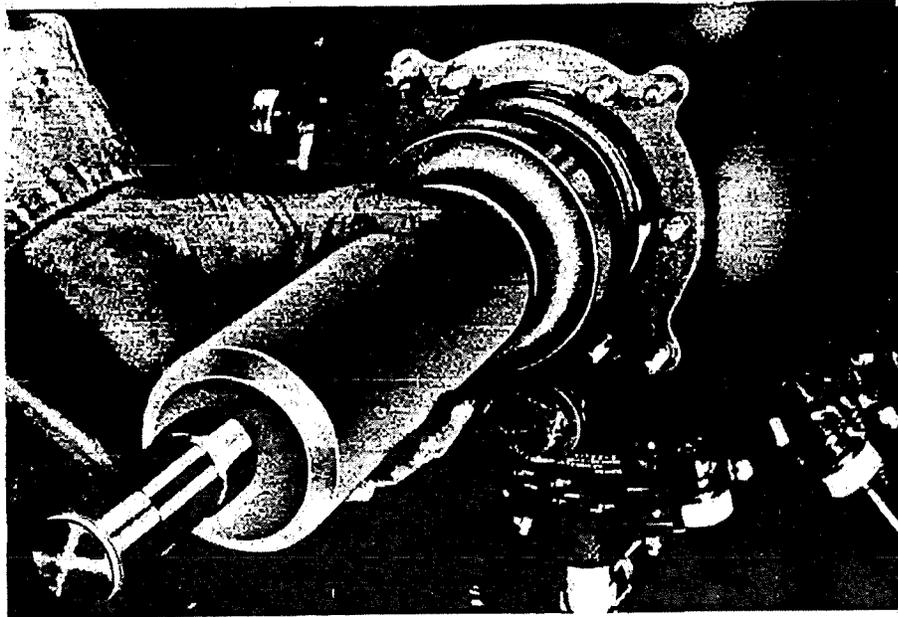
Installing Thrust Bearing Onto Crankshaft
